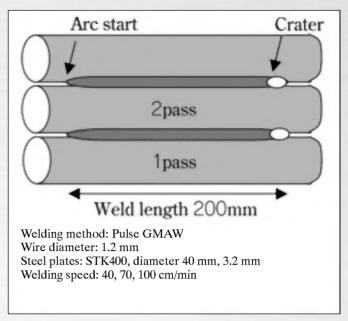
Schematic of pipe welding crack examination.
